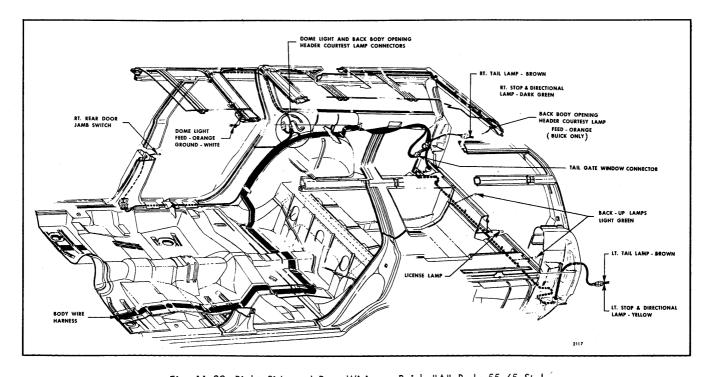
Right Side and Rear Wiring - Buick "A" Body 55-65 Style
